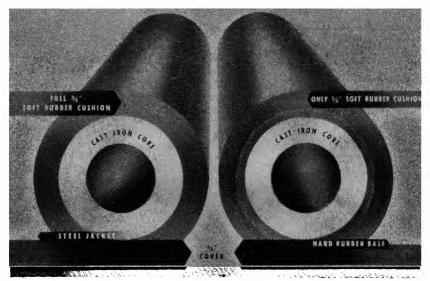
(Left) A steel-jacketed Vulcalock press roll whose rubber cover is bonded to the steel. (Right) A similar roll of conventional construction in which a hard-rubber base is used to bond the soft covering to the cast-iron core.
